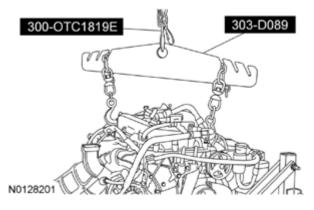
Removing Engine And Transaxle From Powertrain Lift Table Courtesy of FORD MOTOR CO.
